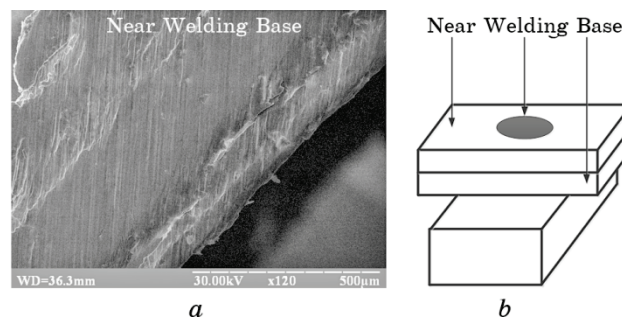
Study of an element of the weld zone on a thin plate. *a*—microelectronic photograph of the welding zones; *b*—diagram of welding zones.
